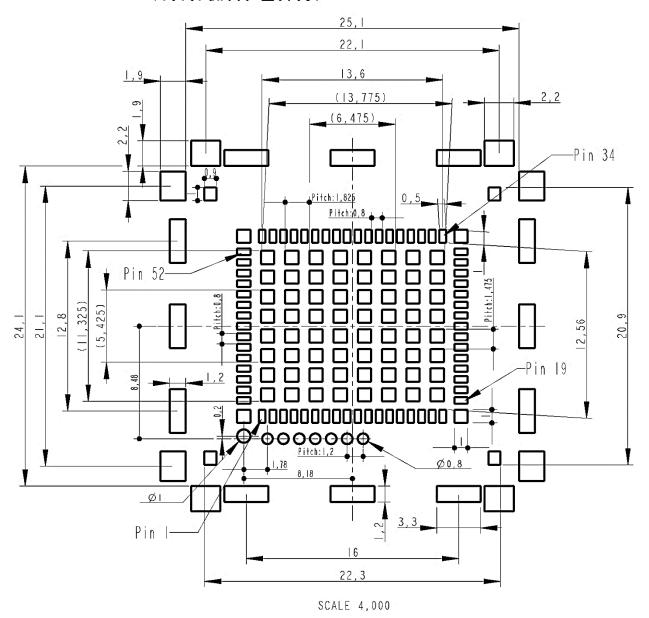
Recommended HL Series Snap-in Socket Footprint - Copper Layout Position
